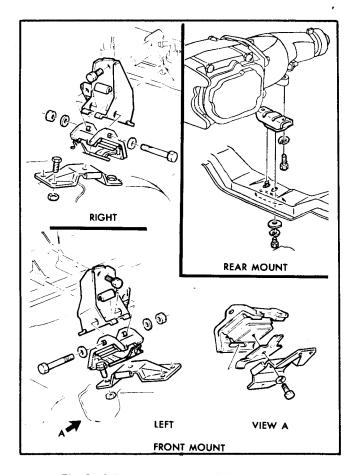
Engine Insulators - 6 Cyl. X Series
